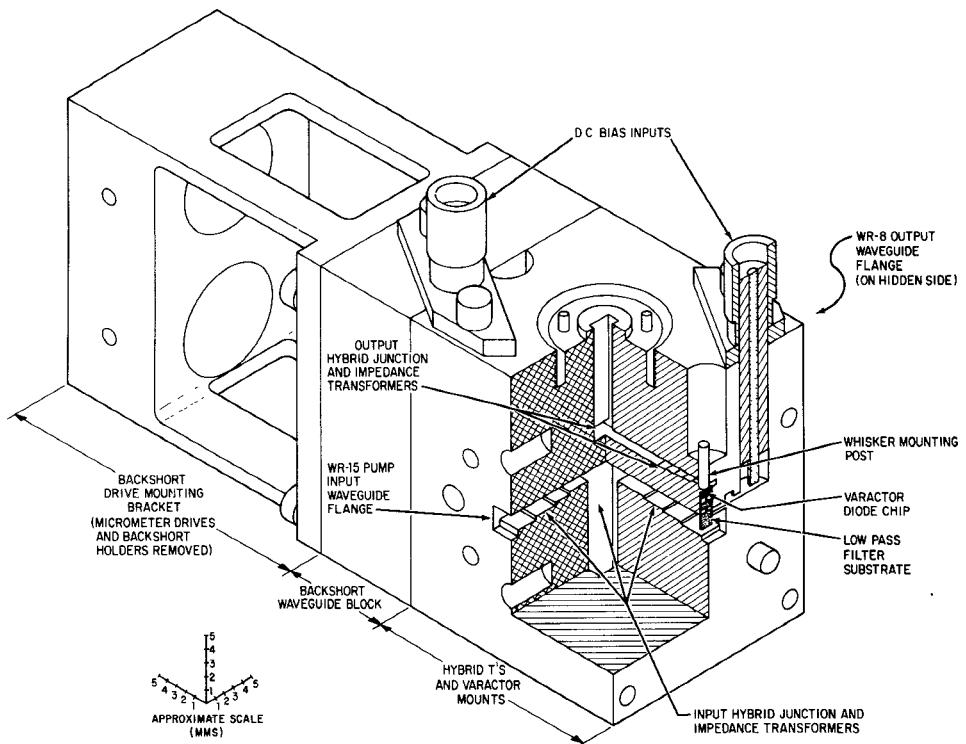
An isometric drawing, approximately to scale, showing the main features of the balanced doubler design. Dimensions are in millimeters.
